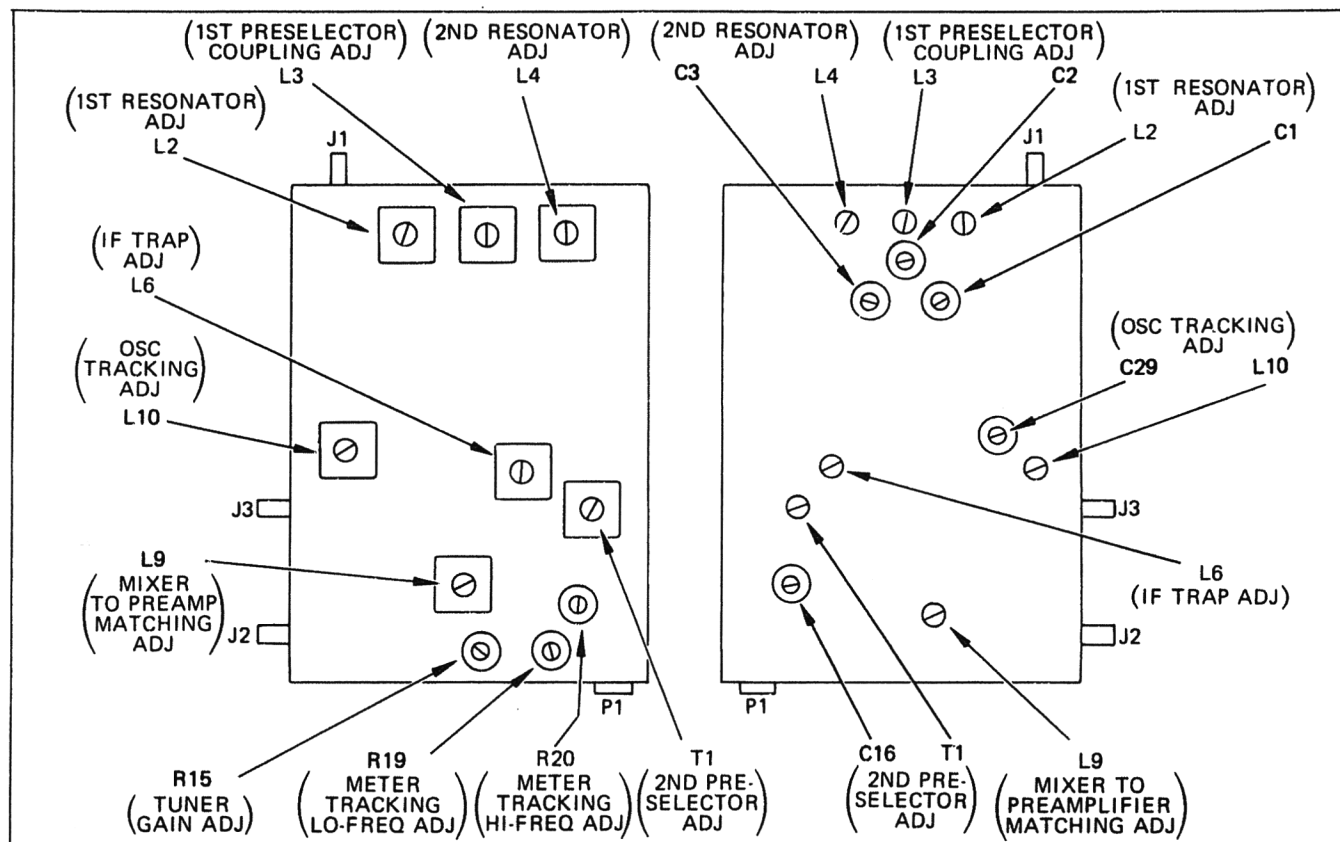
Trimmer Locations, Band 7 Tuner Assembly, A7
